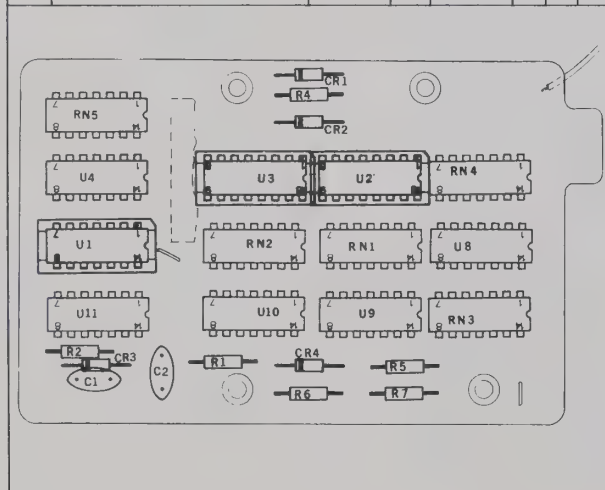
DPOU PCB ASSEMBLY, OPTION -02
